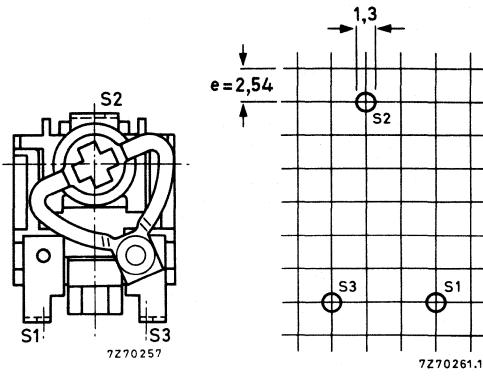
Hole pattern for mounting on a printed-wiring board (solder side).
